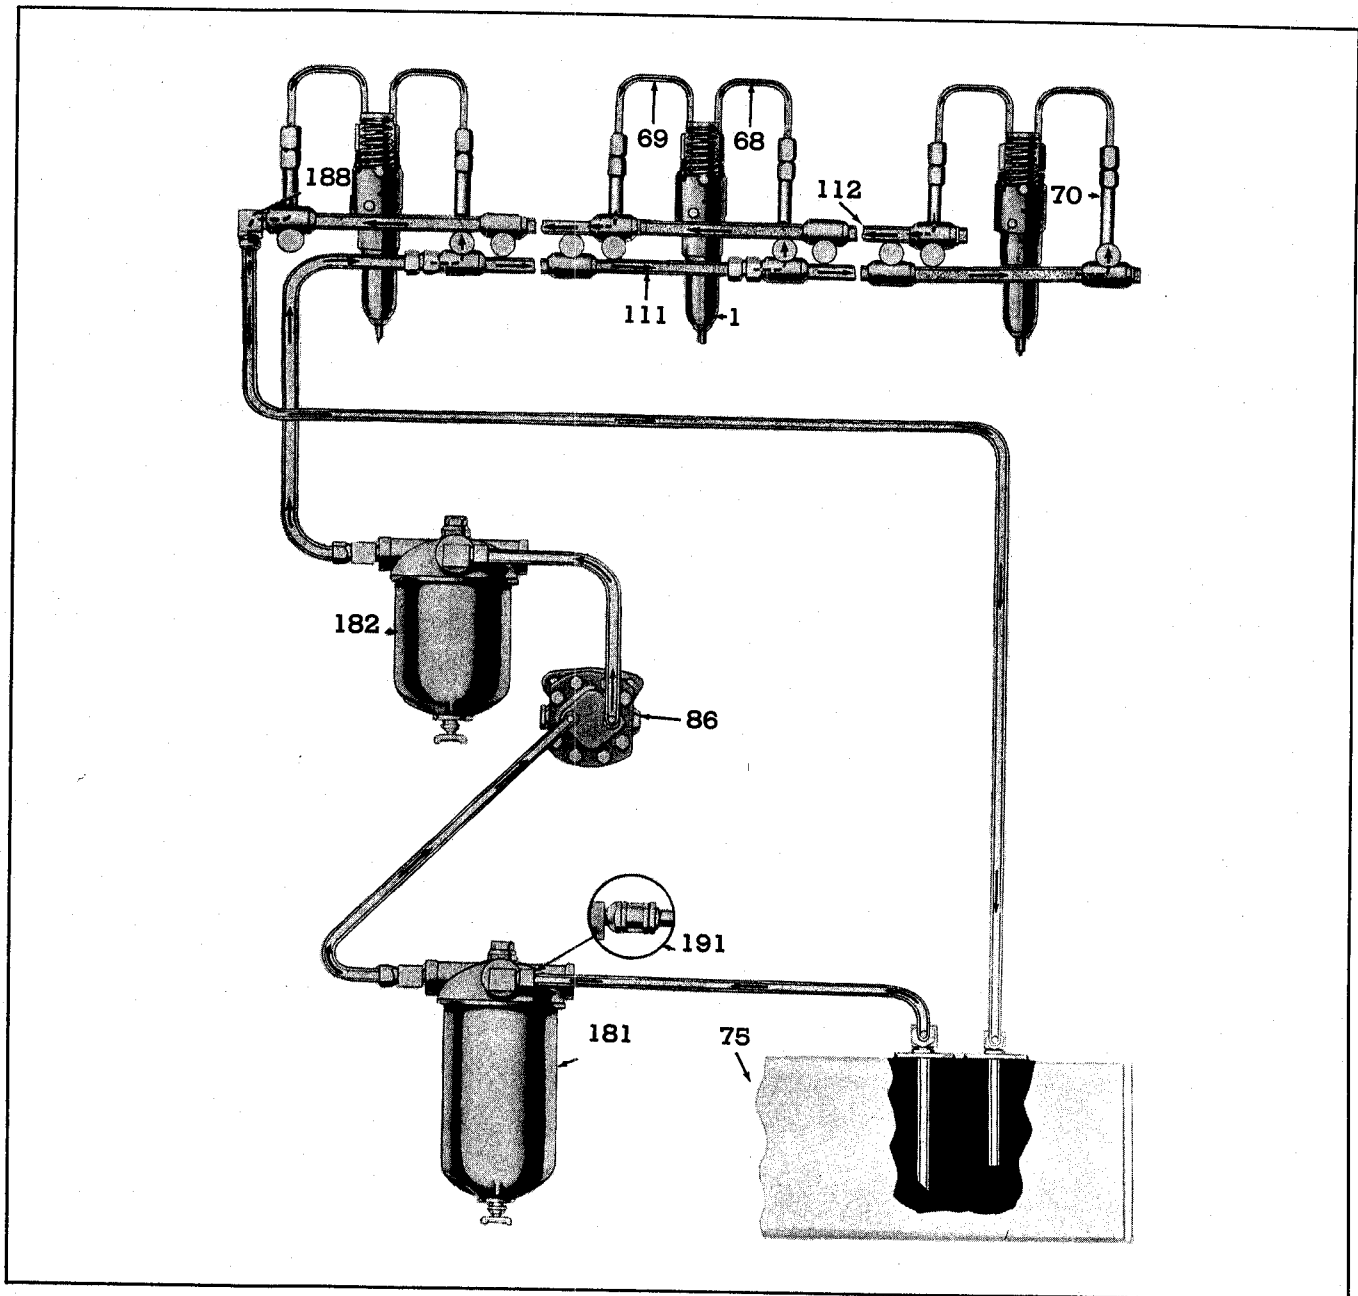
Fuel Supply System Generally Used on Series 71 Engine.
